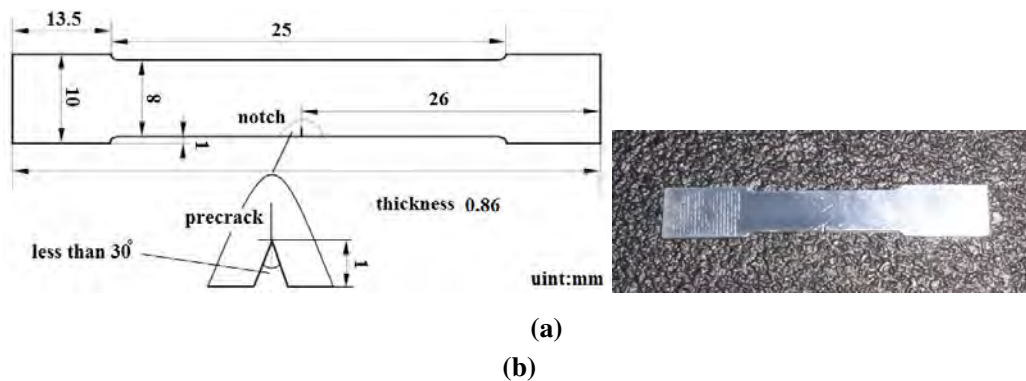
Geometry of test specimen (a) the specimen design; (b) polished specimen.
